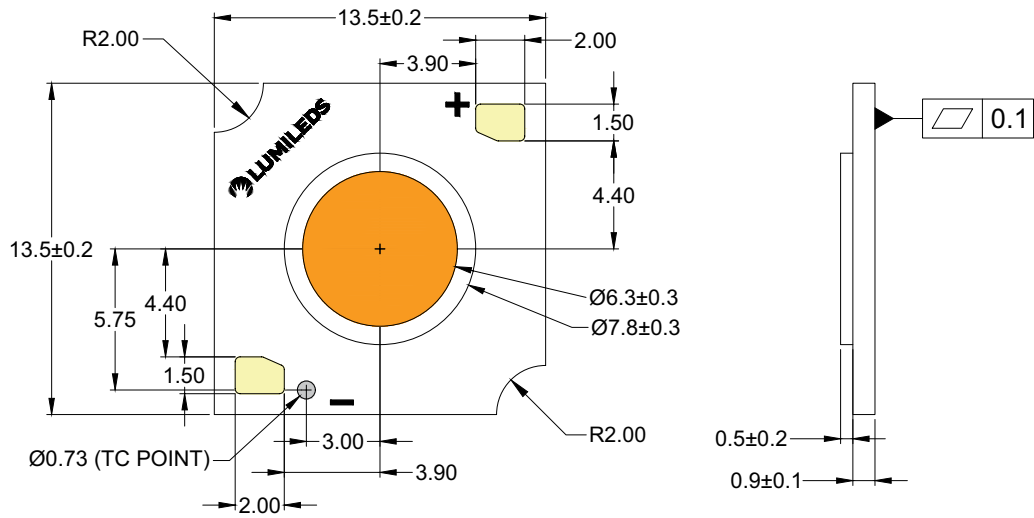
Mechanical dimensions for L2C6-xxHGxL02x0600.
